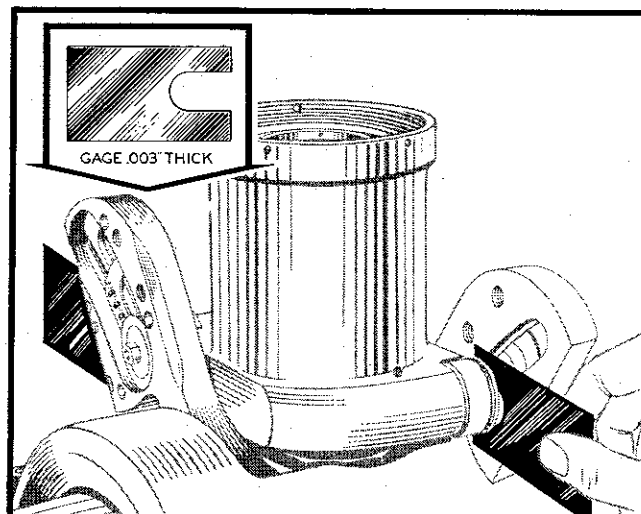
Checking Clearance Between Bracket and Thrust Washer
